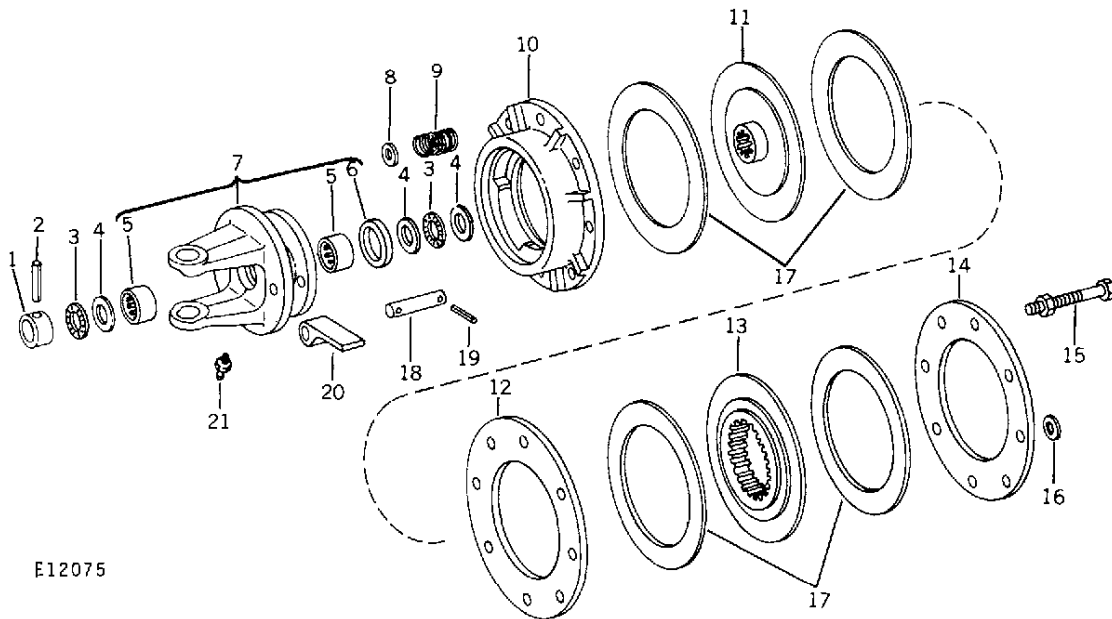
Overrunning Clutch and Slip Clutch Removal
